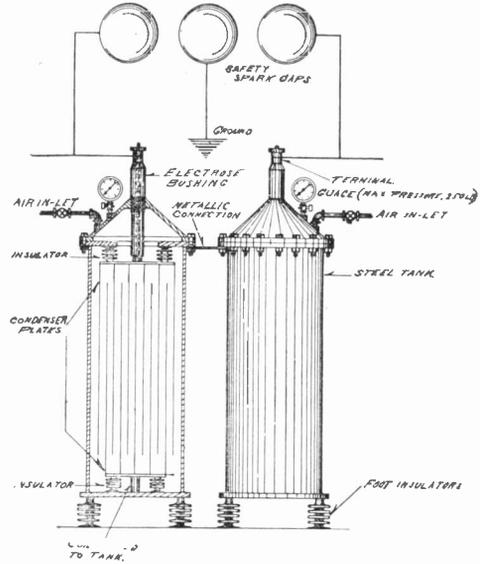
SIDE VIEW AND CROSS SECTION OF CONDENSER
